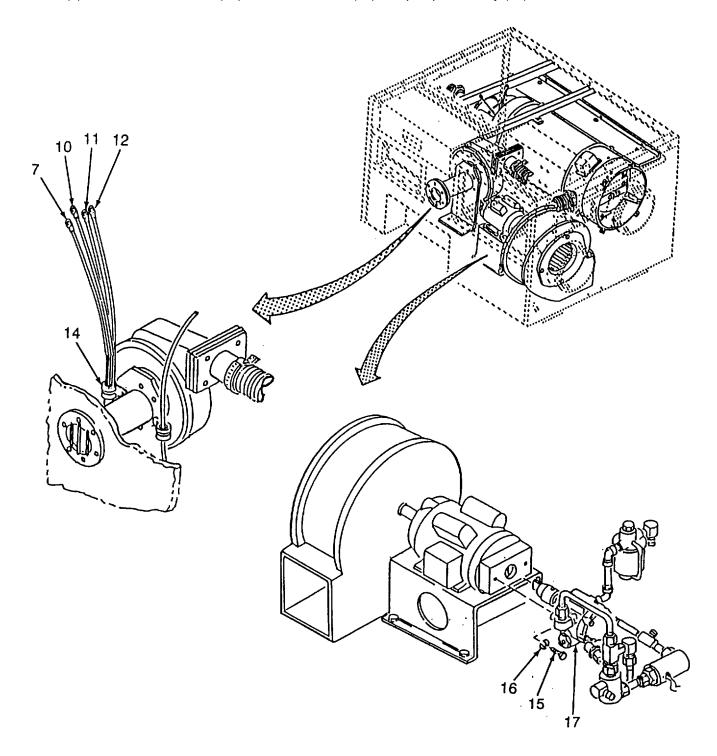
Fuel Pump and Solenoid Valve Removal (Sheet 2 of 2)
